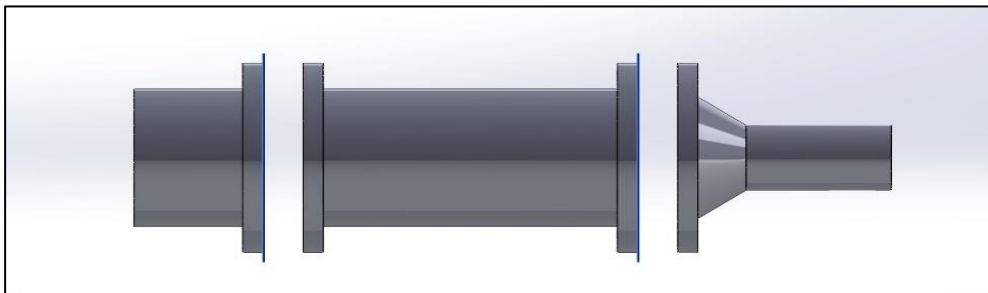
Isometric CAD representation of the hybrid rocket motor assembly
